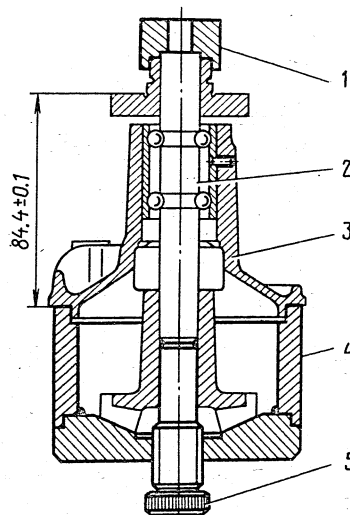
Installing the Impeller on Pump Shaft with Tool A.60430:
